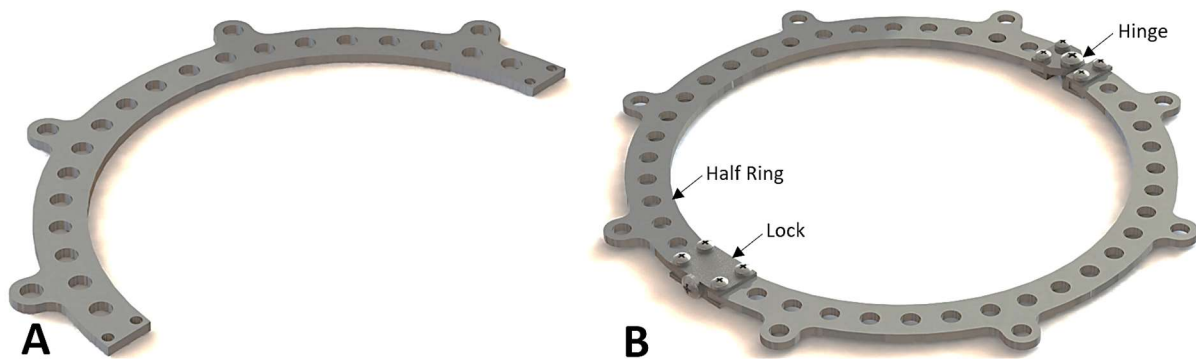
Concept 2 –(A) The segmented half ring of the C-joint ring assembly (B) A full completed assembly of the C-jointed ring with the bolted hinge-and-lock system, that when assembled together would form the fixator ring's mechanical structure.
